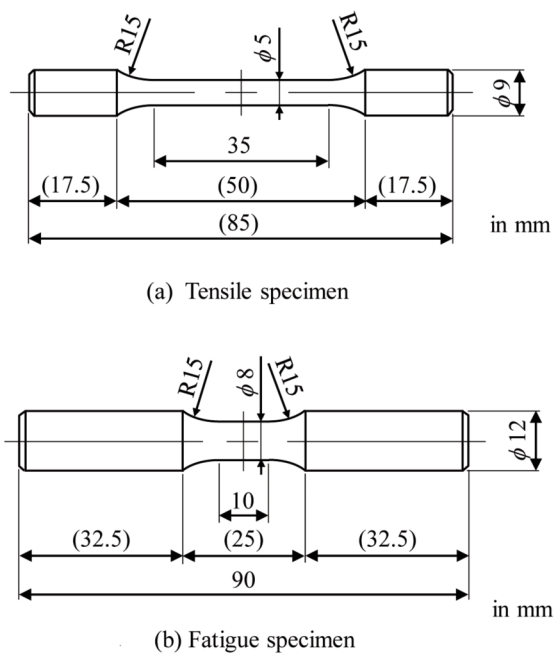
Shapes and dimensions of the tensile and fatigue specimens.
